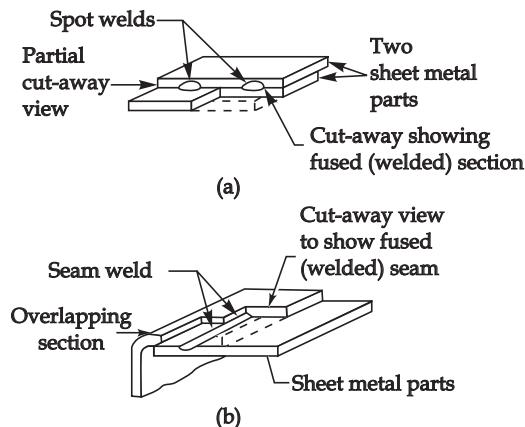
(b) Spot weld; and seam weld.
